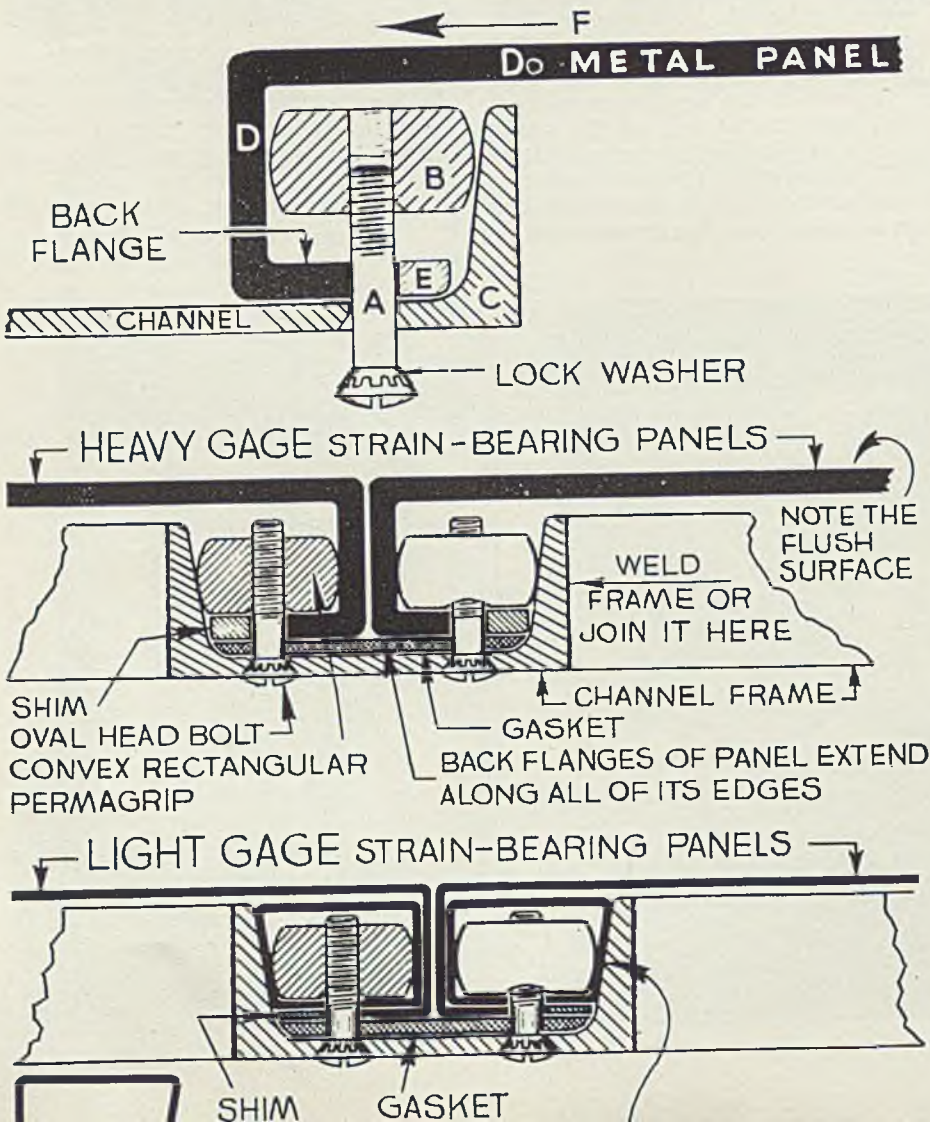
(Top)—Permagrip tension method is outlined here. Arrows indicate points where tension is developed as bolt A draws fastener B into position during assembly. D is metal panel with C portion of channel, the sloping inner surface of which develops the wedge action
